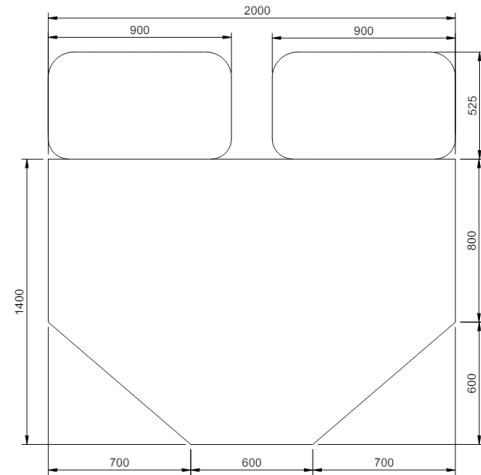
Dimensions in millimetres of the front view of the water tank and retardant tanks.
